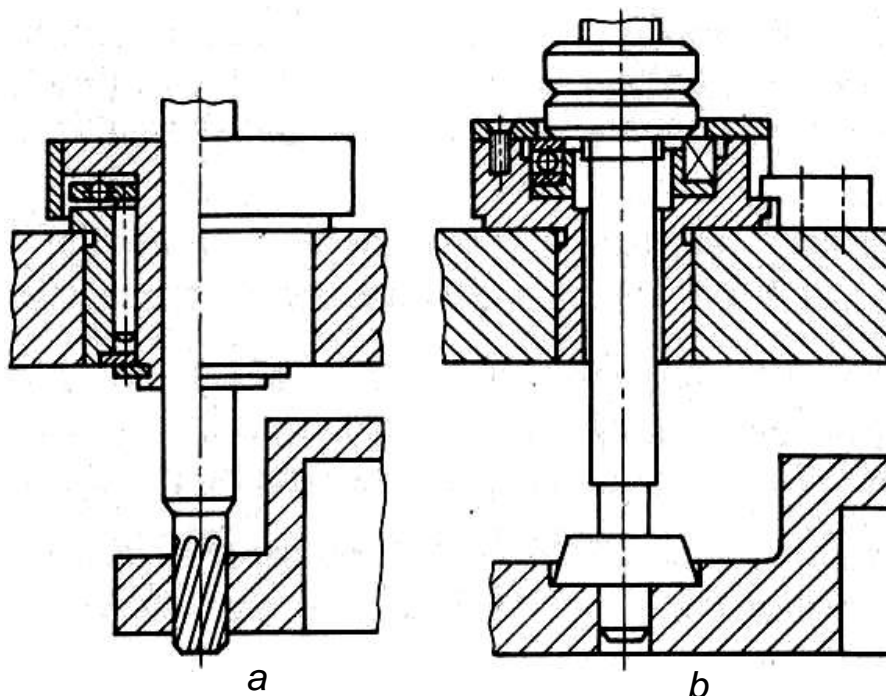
Rotating bushings: *a* – for guiding a tool (reamer); *b* – jig stop
